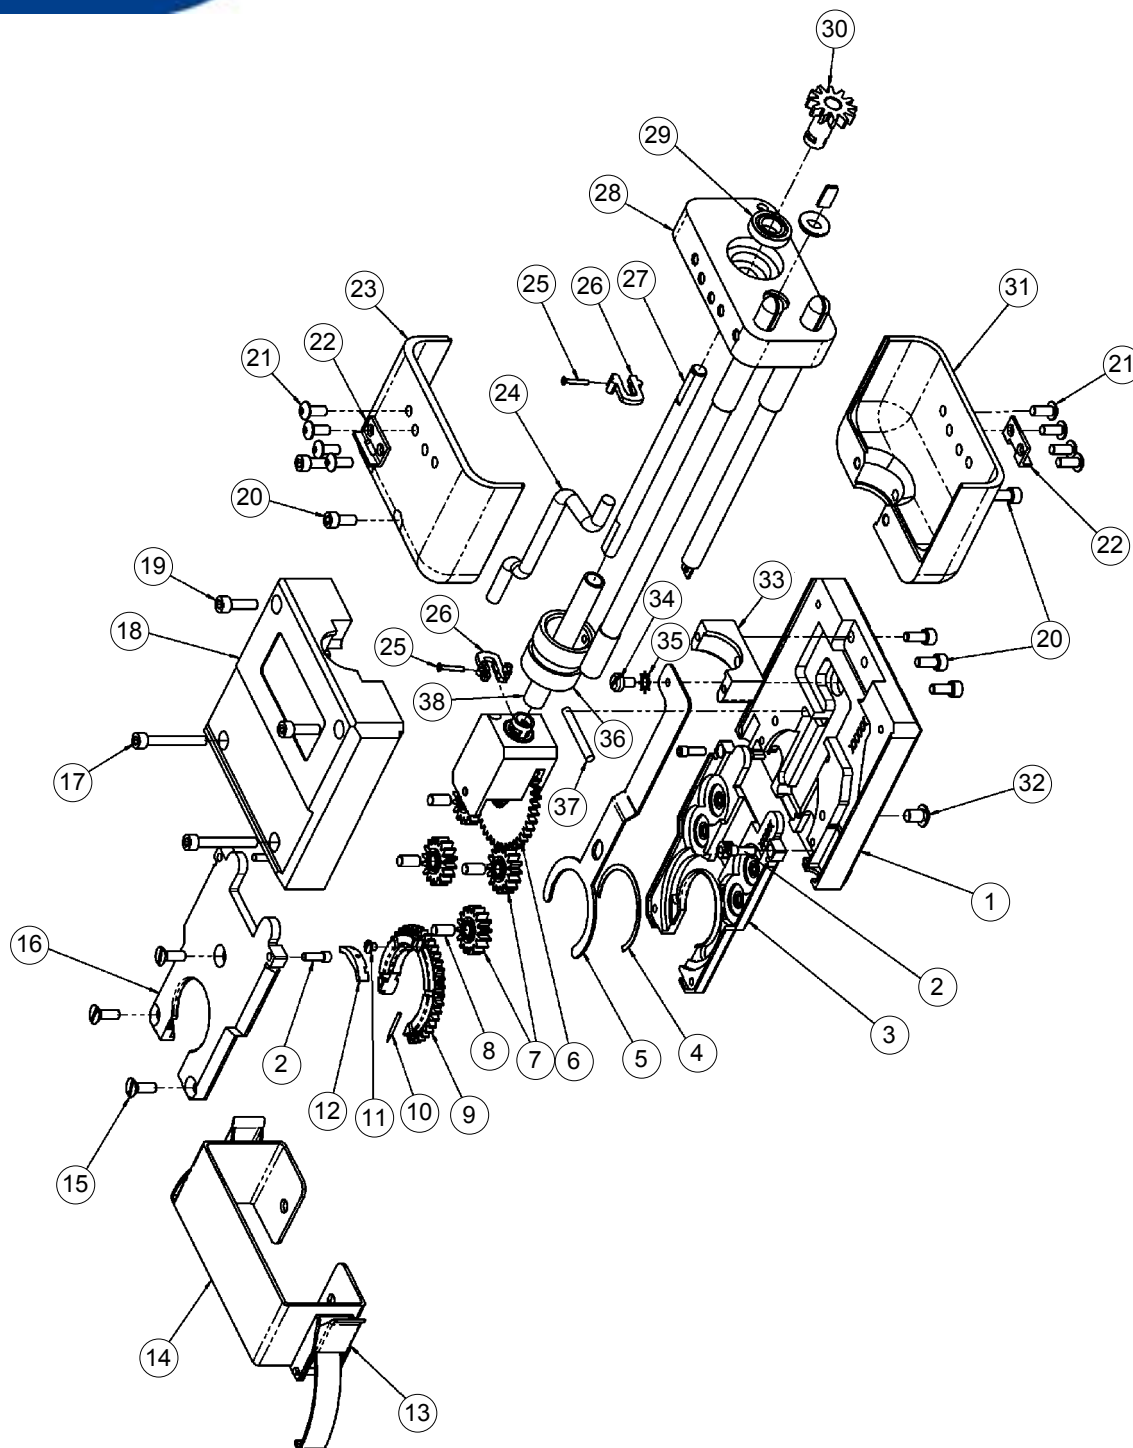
SWS-8MRH-B Rigid Weld Head
